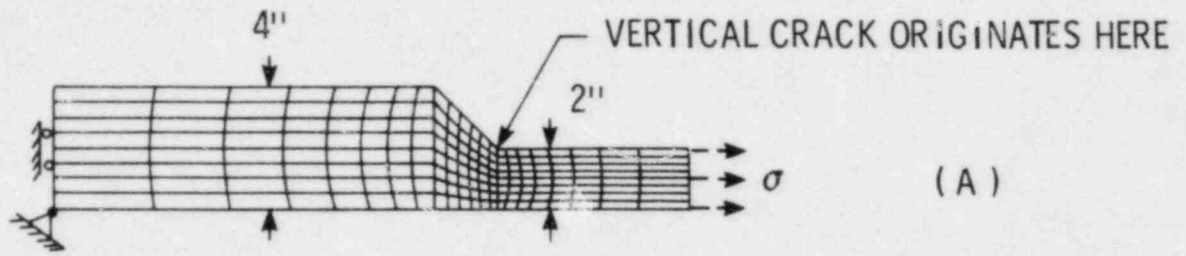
CRACK AT THE TOE OF A FILLET WELD IN A REINFORCED PLATE UNDER TENSION
